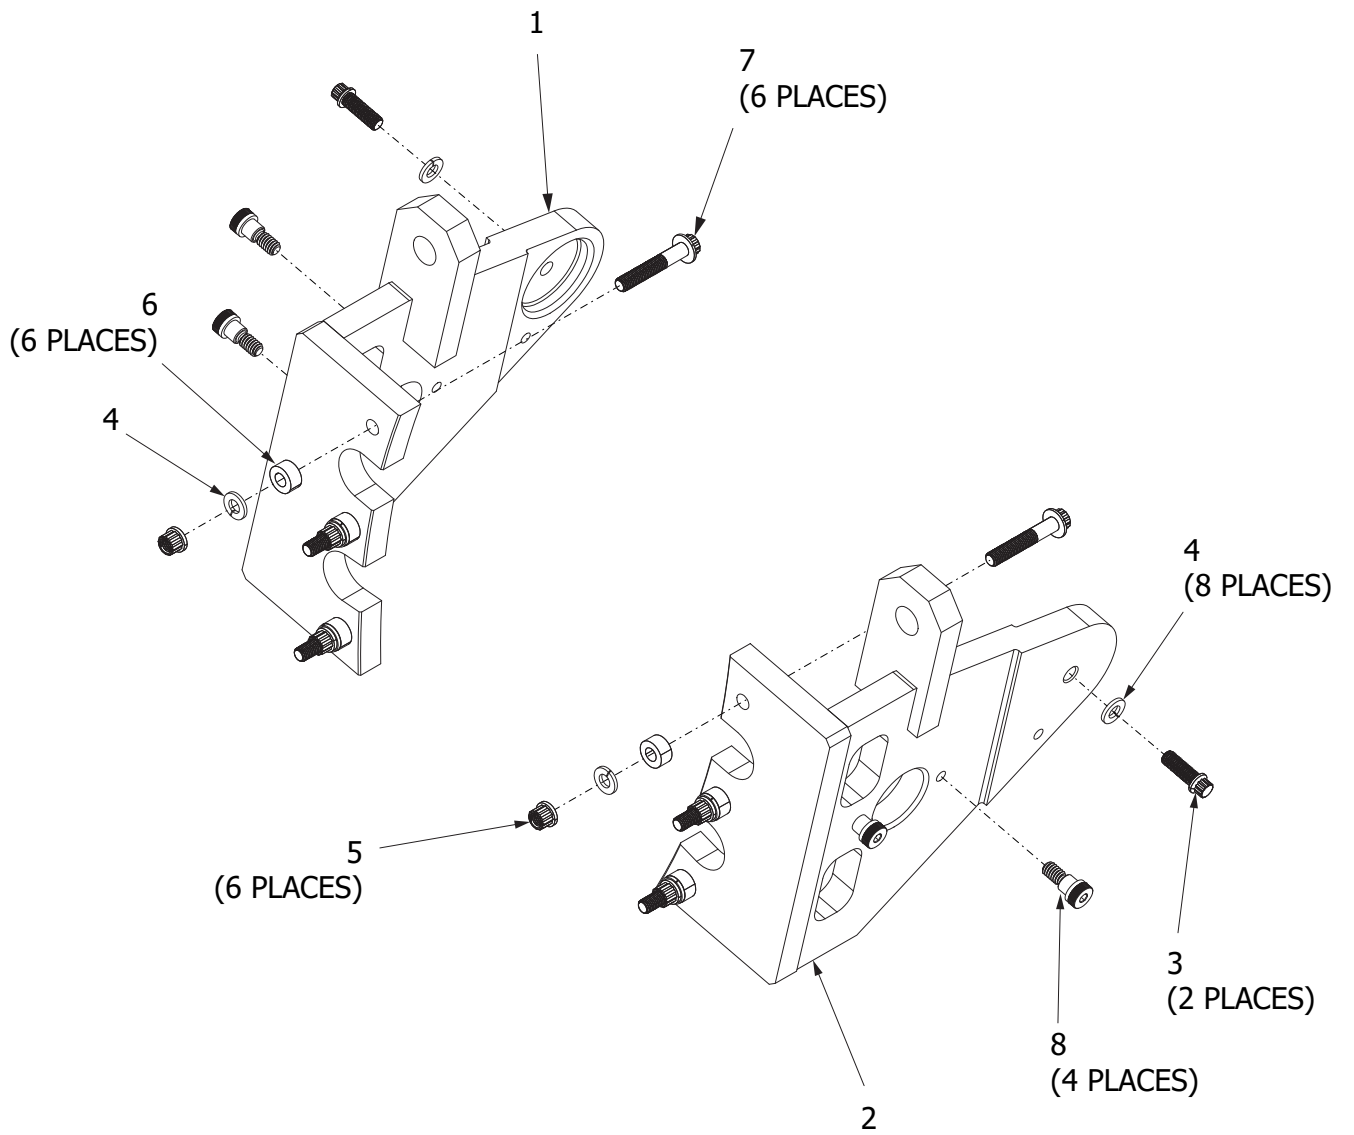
PWA109790 -Turbine Exhaust Case Shipping Adapter Assembly
